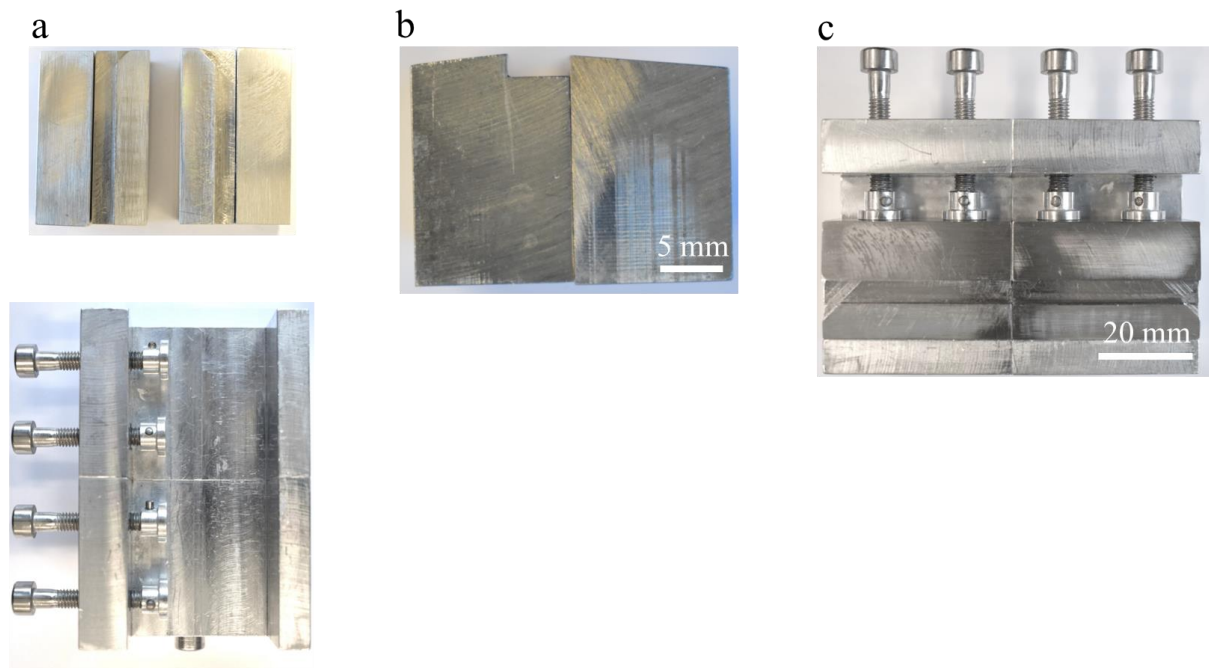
Knife-edge split stainless steel mould. (a) Parts of the split mould and clamping block with cap screws (top view). (b) End view showing knife edges. (c) Assembled, showing mould slot (top view).
